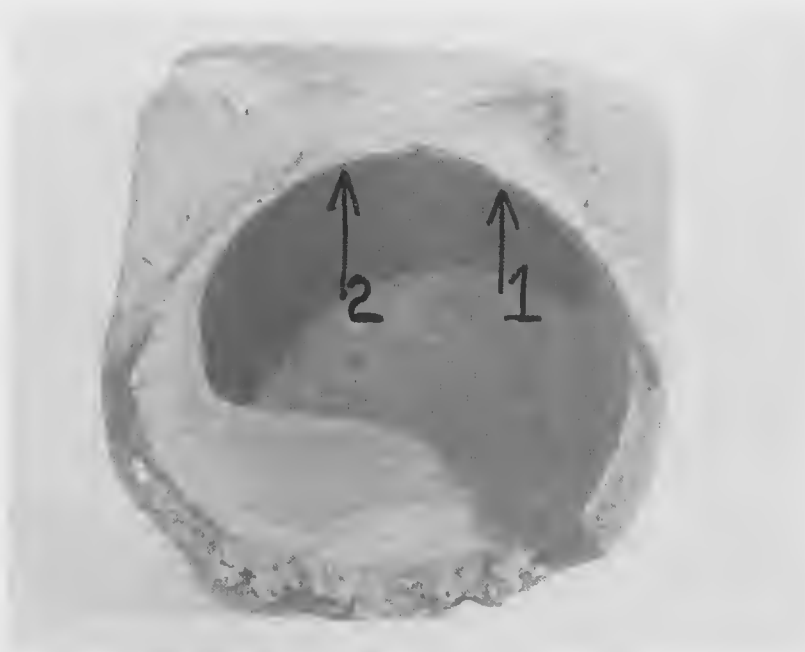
View of fracture surface of casting from right side of Fig. 2. Weld is at top. Extensive voids and porosity are visible at bottom.
